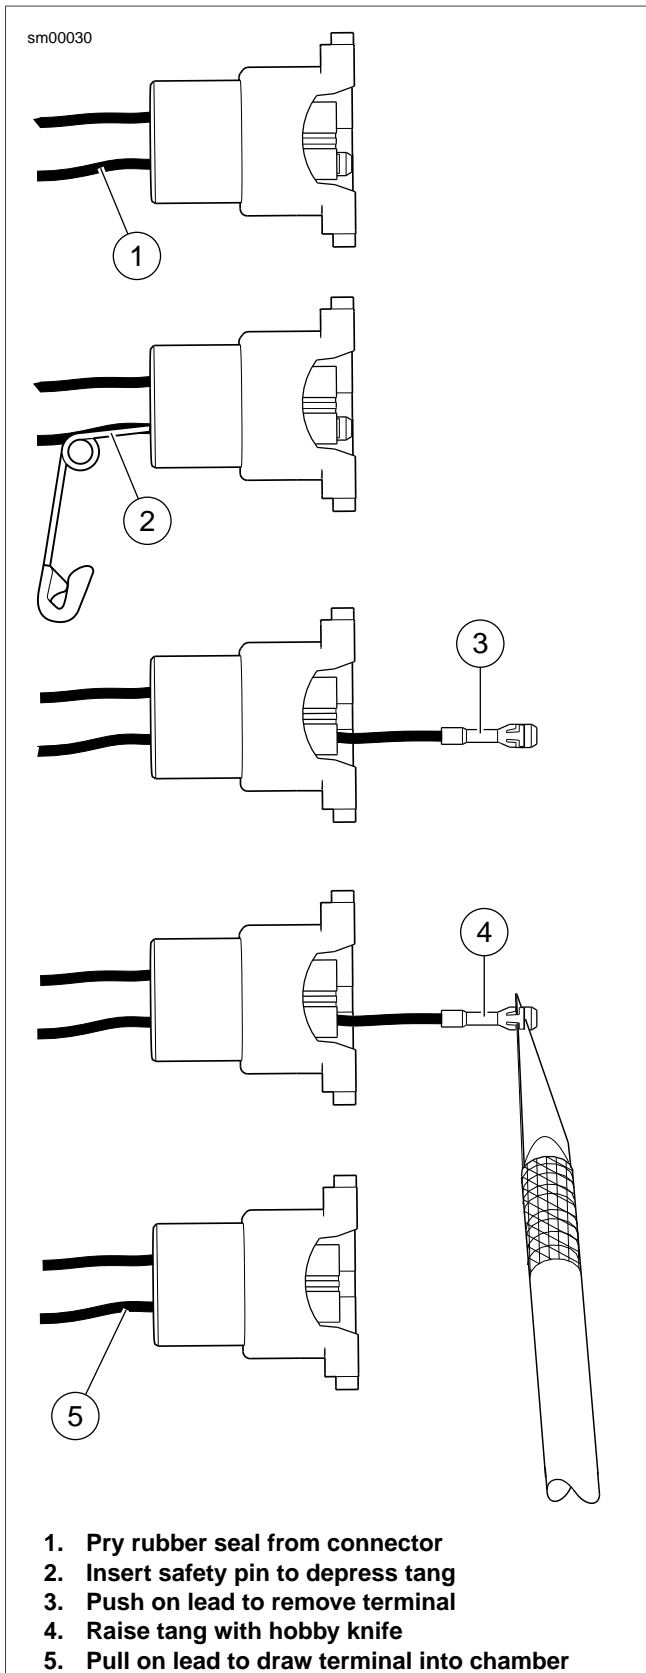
280 Metri-Pack Connector: Remove/Install Socket Terminal
